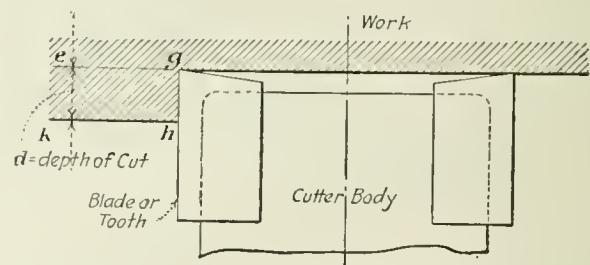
FACE MILL WITH SQUARE CORNERS ON BLADES
